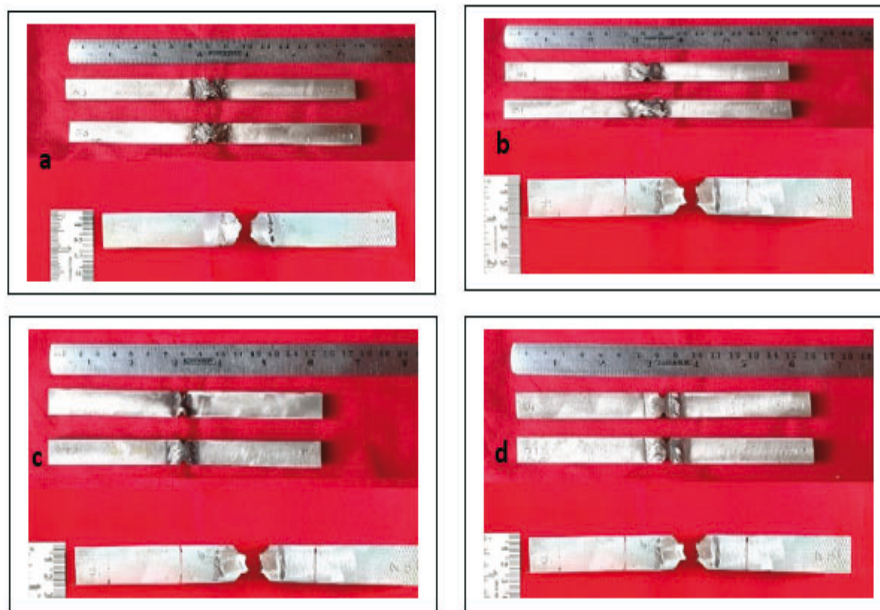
Locations of the notch tensile fracture in specimens before and after the test: (a) CC-GMAW; (c) DPC-GMAW; (b) PC-GMAW; and (d) CMT-GMAW
